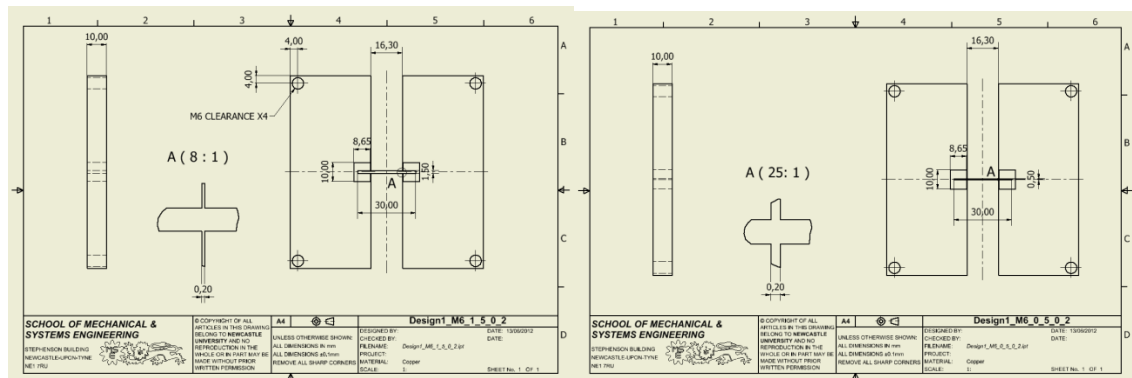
Left to right, engineering designs for P3A and P3B XBRs, as fabricated.
